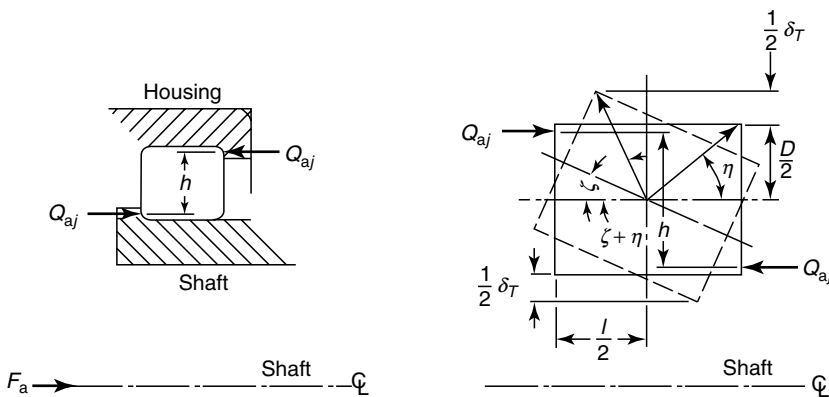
Thrust couple, roller tilting, and interference owing to applied thrust load.
